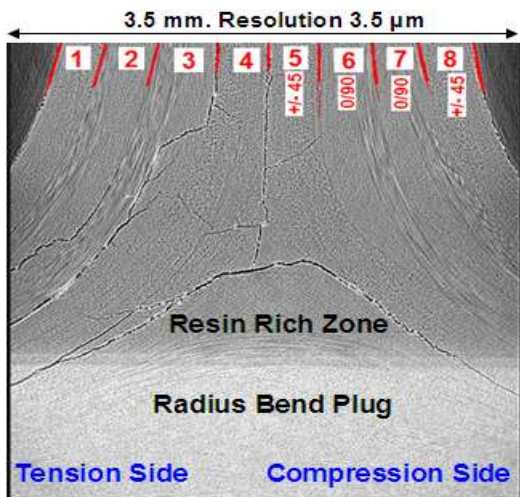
Micro-CT of front view of 25% embedded carbon epoxy T-joint bending fracture surface showing failure at resin-rich zone and inter and intra-laminar cracking on tensile side
